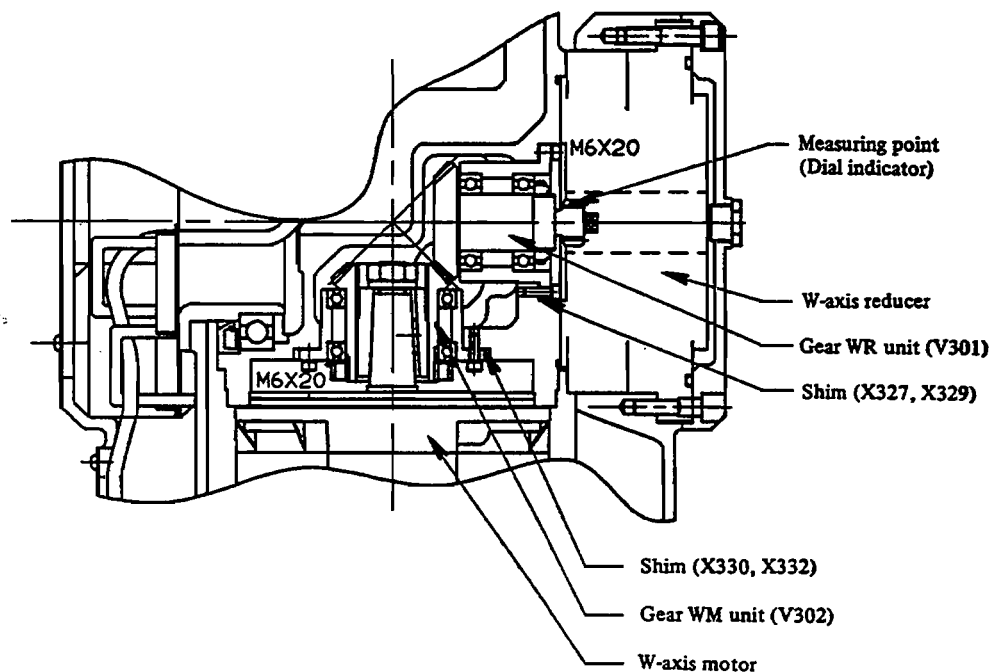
(a) Adjusting W-axis bevel gear backlash
